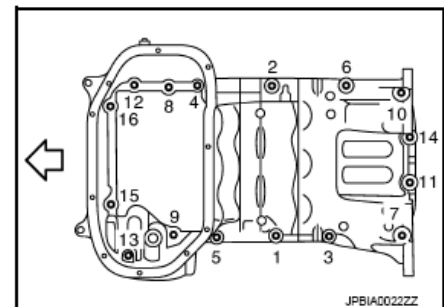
Identifying Oil Pan (Upper) Mounting Bolts Tightening Sequence
